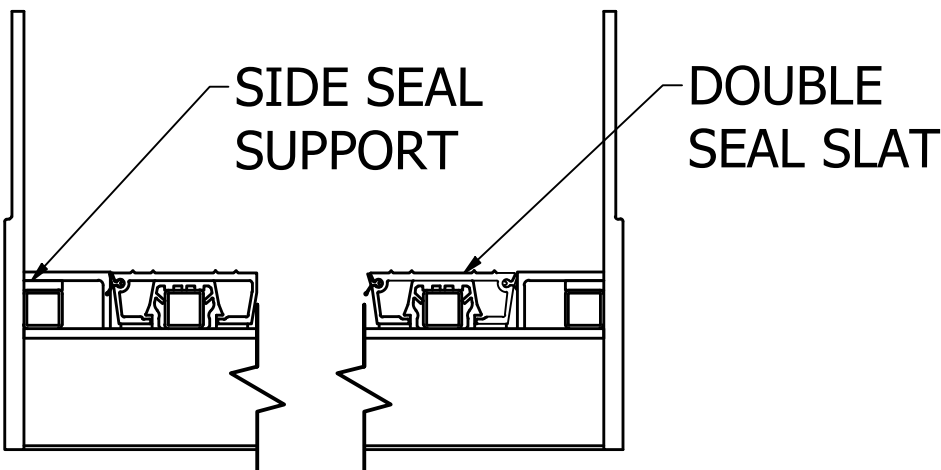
ANGLE IRON OR ALUMINUM EXTRUSION SIDE SEAL
